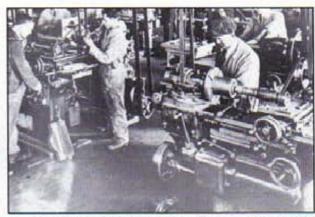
Assembly of the Heald internal sliding spindle grinding machines, c.1920.
